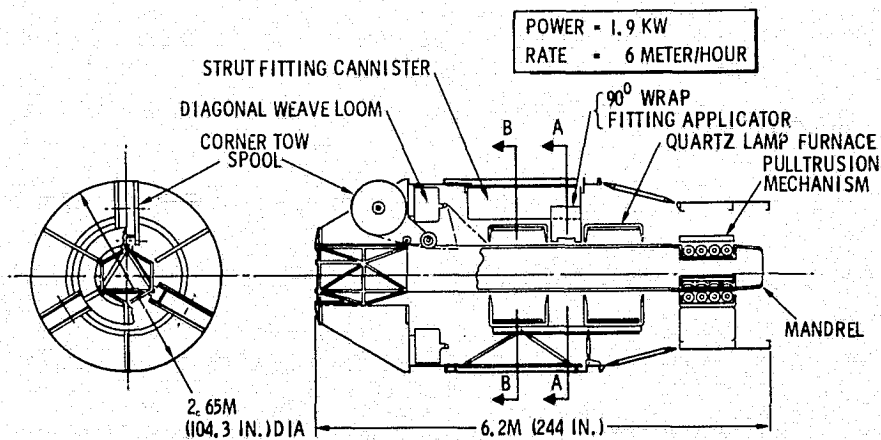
Fabrication Module – 1m Beam Composite Constructions
